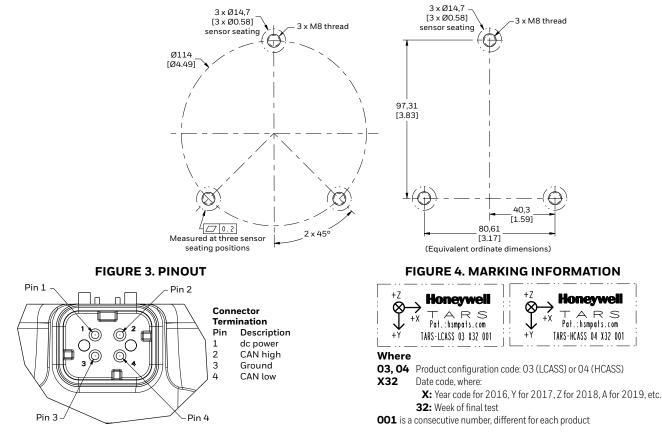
MOUNTING HOLES DIMENSIONS (FOR REFERENCE ONLY: mm [in])
